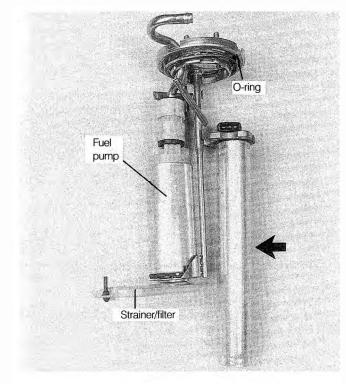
Fuel pump assembly. Fuel gauge sending unit shown removed from assembly (arrow).
